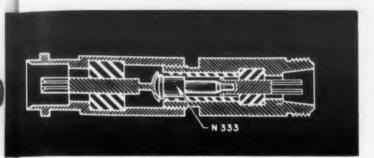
The cartridge-mounted thermistor inserted in a standard, coaxial-cable crystal holder. The unit can be inserted in a waveguide in a similar manner.
